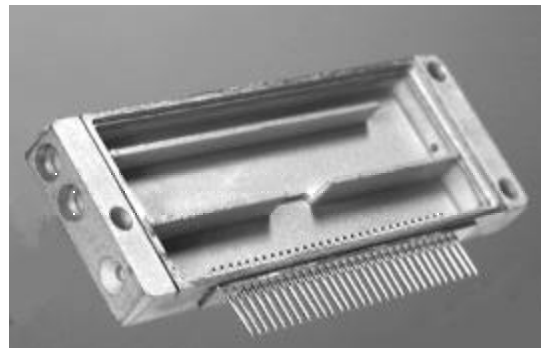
Ni-Au plated AlSiC microwave package assembled with coaxial feedthrus and 30-pin header and Fe-Ni Alloy sealring.
